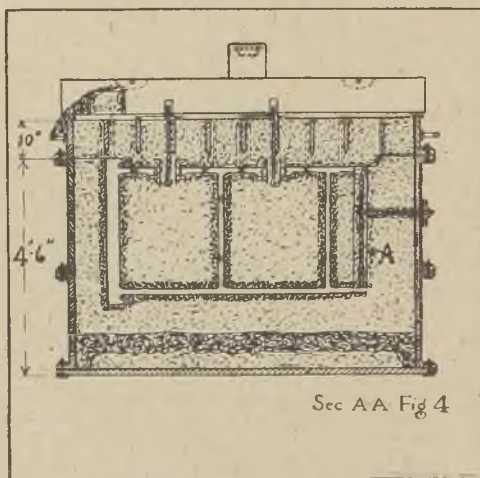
SECTIONAL VIEW OF THE ASSEMBLED MOULD AT THE POINT A—A.
